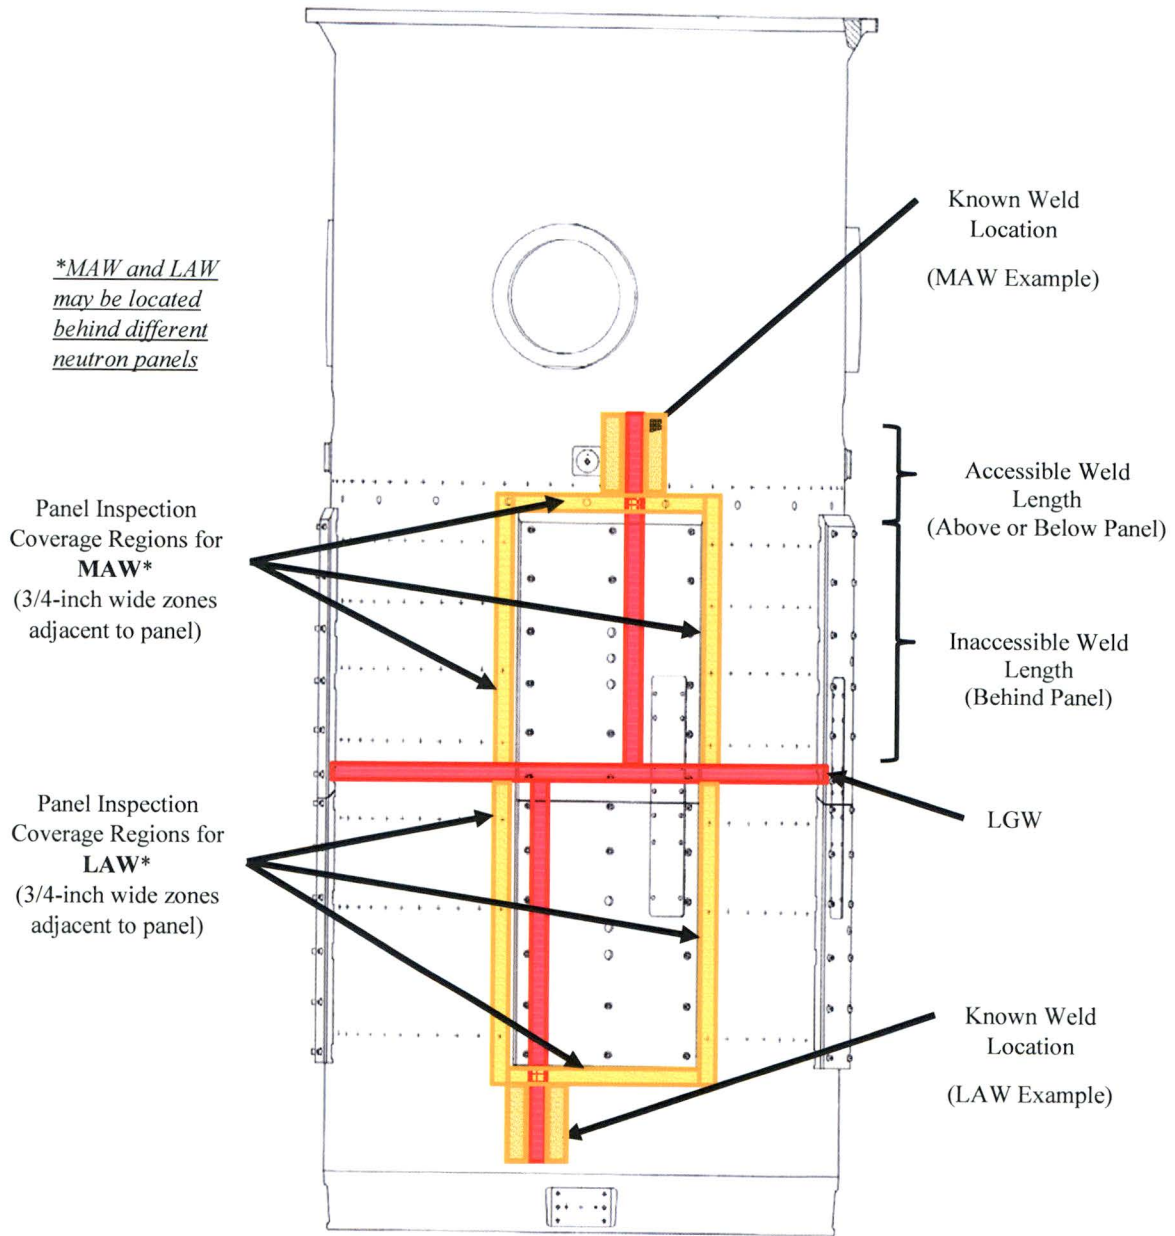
Example of Westinghouse Neutron Panel Inspection Option – Known Partially Inaccessible Axial Weld Locations
